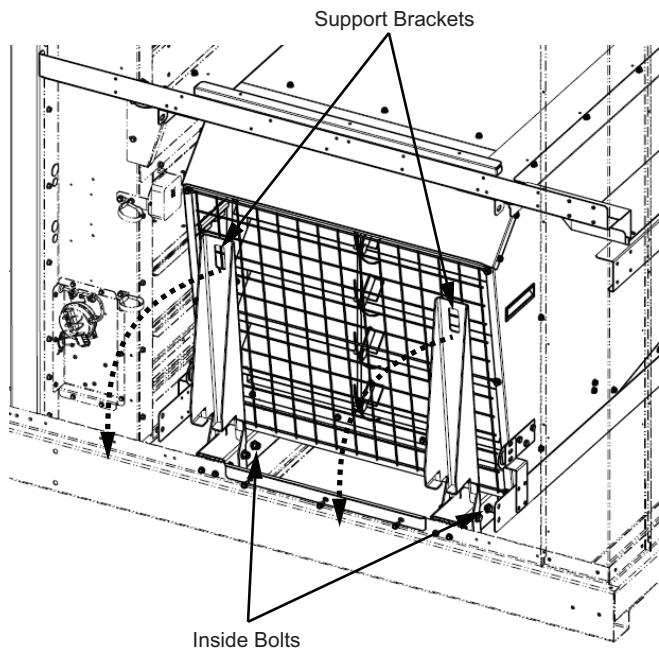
Power Exhaust Support Bracket and Inside Bolt Locations
